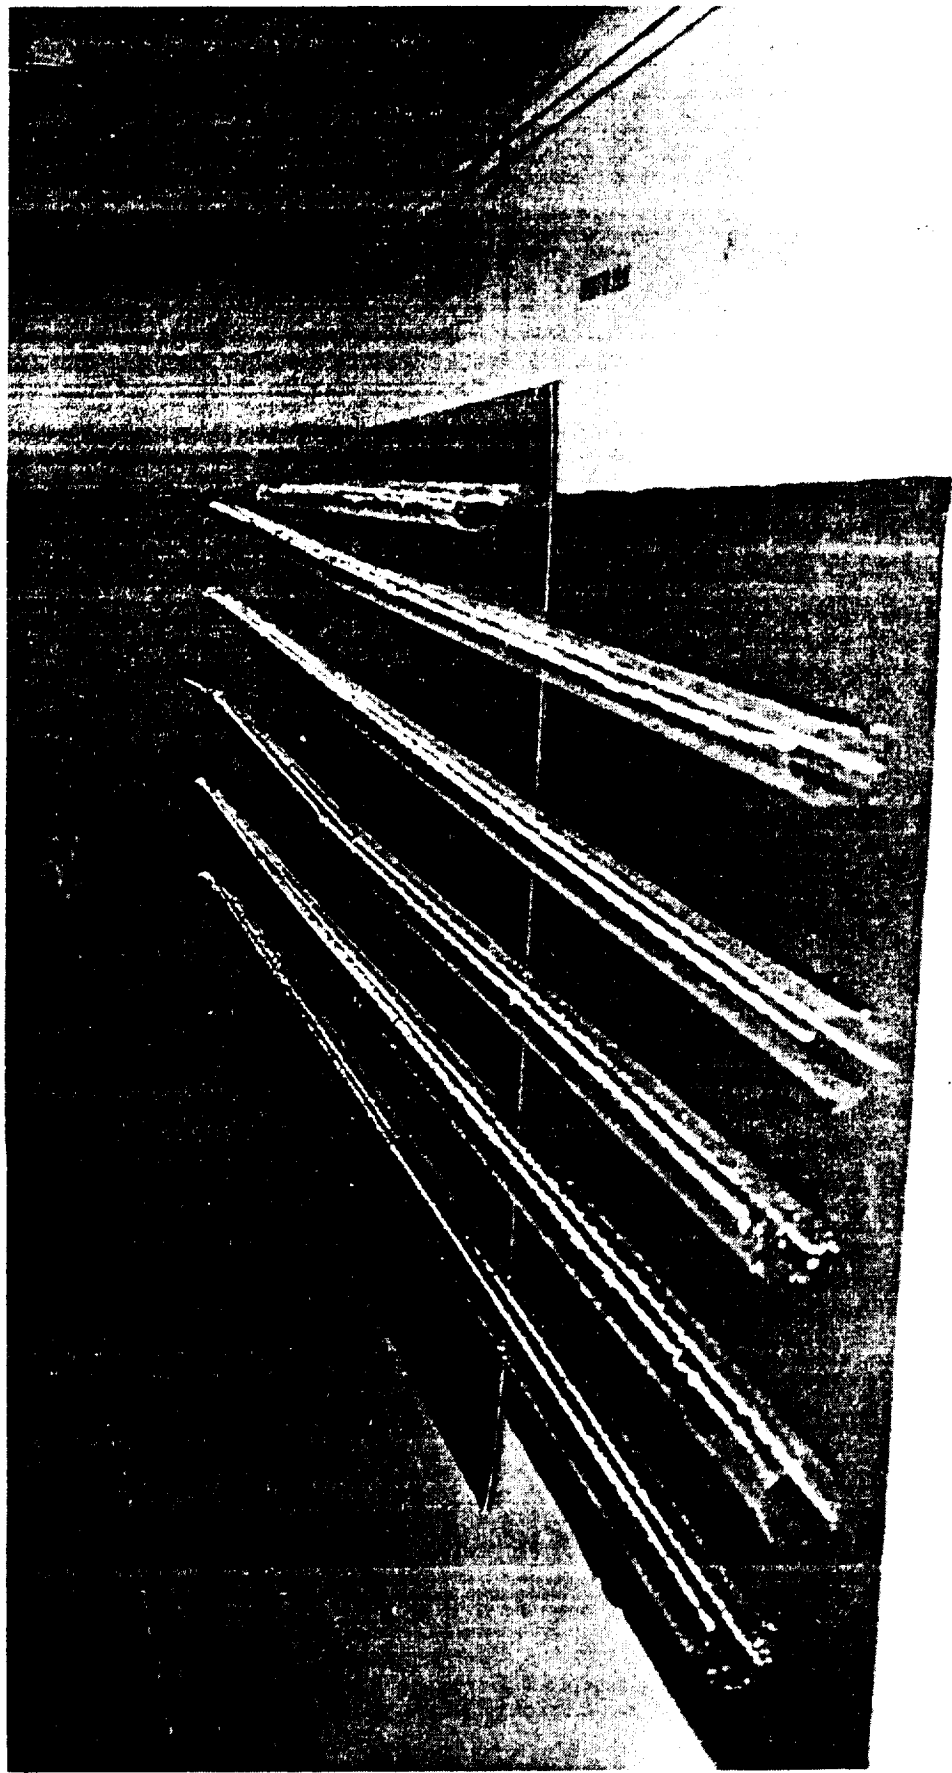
Eight-foot specimens of Space Tubes made on the Winder-Welder. There are more than 7000 individual welds in the photograph, and the crossing of two wires is invariably welded.
